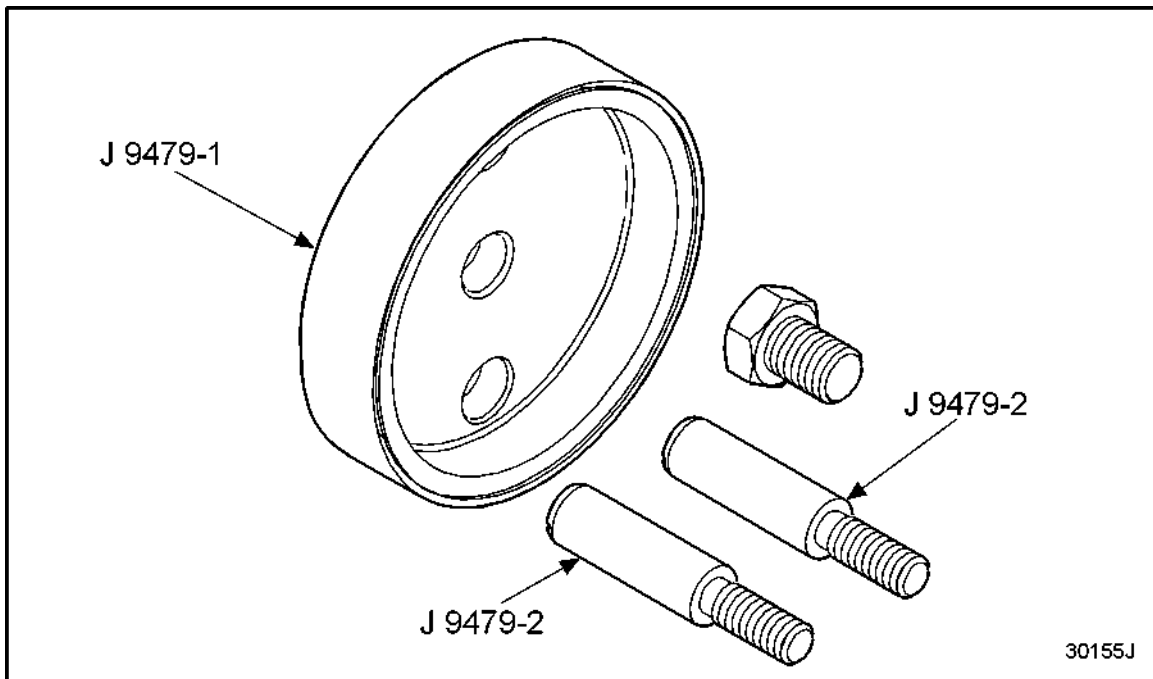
Rear Seal Install (STD Seal 53,6V-53),J 9479
